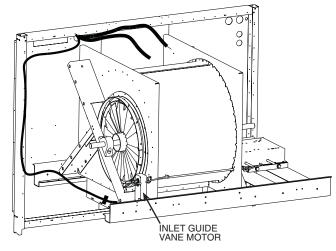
A — Inlet Guide Vane Motor (Sizes 055-070)
